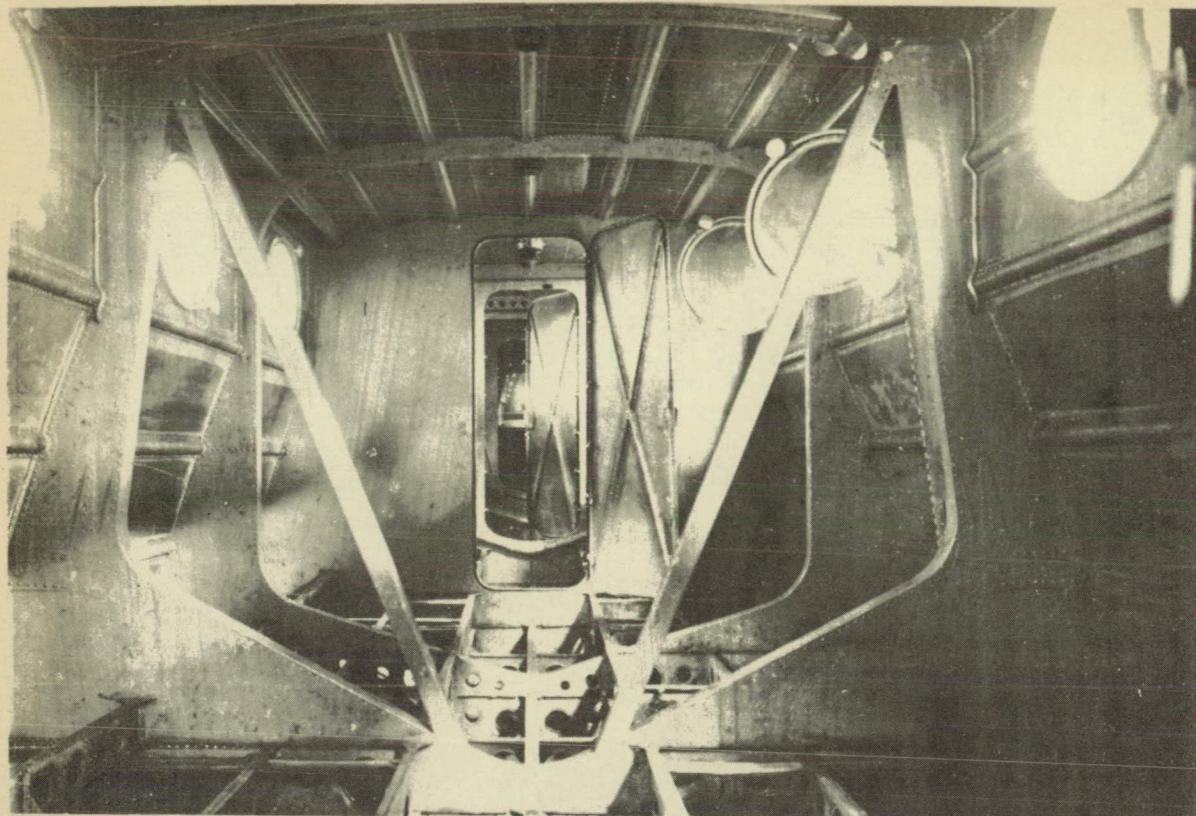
Interior view of the hull of the Latécoère 501 seaplane.
